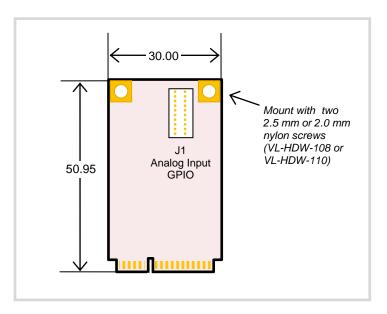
VL-MPEe-A1/A2 Dimensions and Connectors
